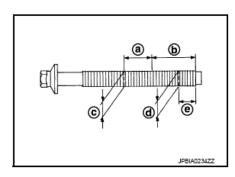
Identifying Lower Cylinder Block Bolt Outer Diameter Courtesy of NISSAN NORTH AMERICA, INC.
